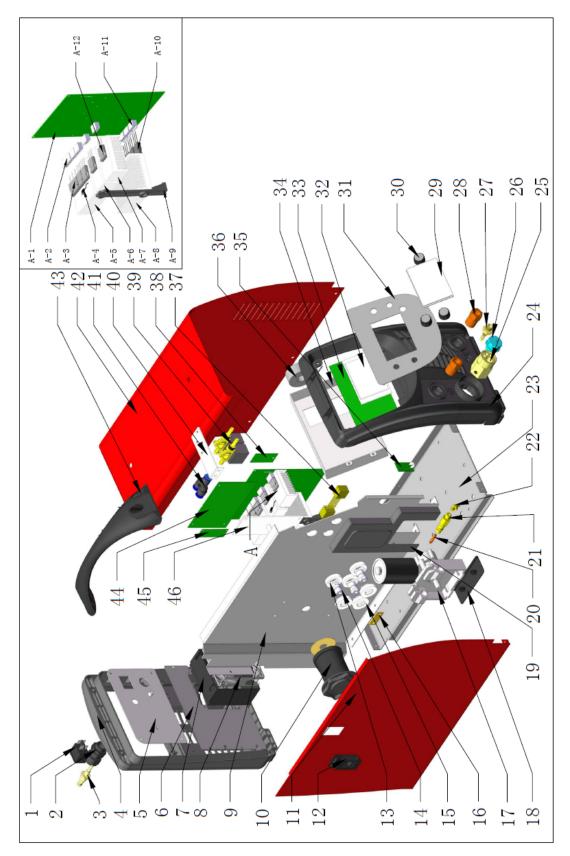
Spare parts drawing Easy-MIG 181 Multi
